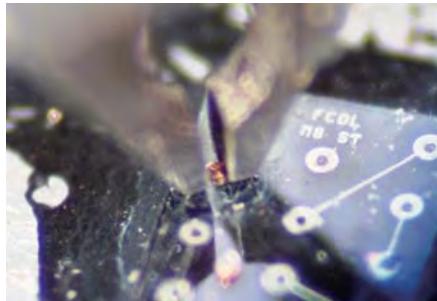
View of First Bond Ball Pull jaw closing over the copper ball bond prior to the pull testing taking place.
